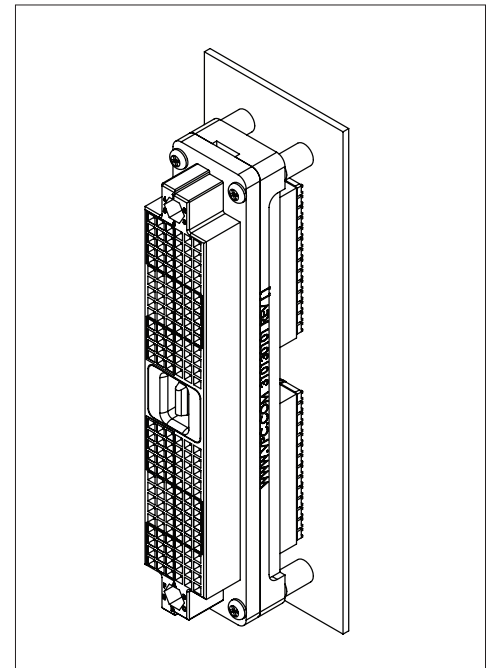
receiver, Part # 310 130 101, loaded with twin female contacts, Part # 610 138 200. Twin male headers are used to connect the female contacts to the PCB plated thru holes.
